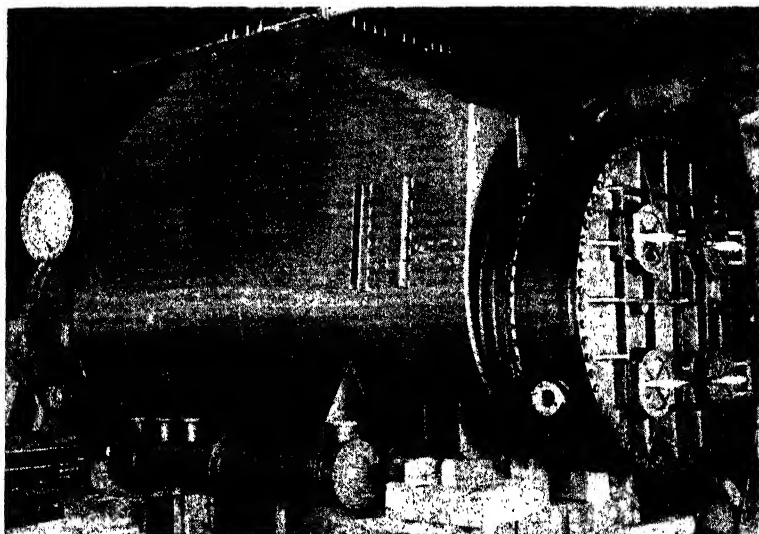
Foster Wheeler 13,000-sq. ft. welded-shell surface condenser.
